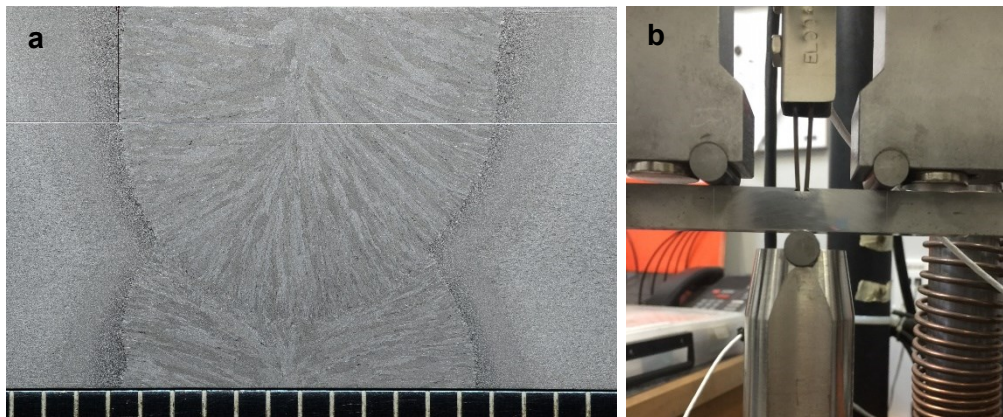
(a) Typical weld profile and HAZ surface notch location. (b) Setup for fatigue pre-cracking.
